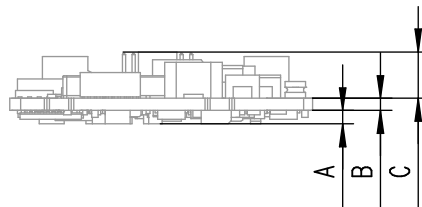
Mechanical Dimensions ETK-S4.2C: Microcontroller with Socket Adapter mounted
